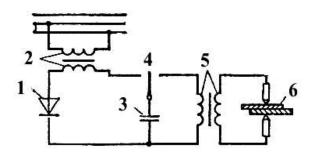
Percussion welding: 1 - rectifier; 2, 5 - transformer; 3 - capacitor; 4 - switch; 6 - parts to be welded
